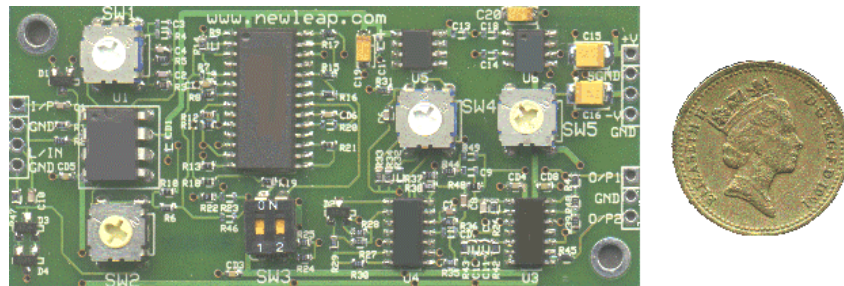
ECD Circuit - CAM surface mount assembly - with £1 coin for scale
